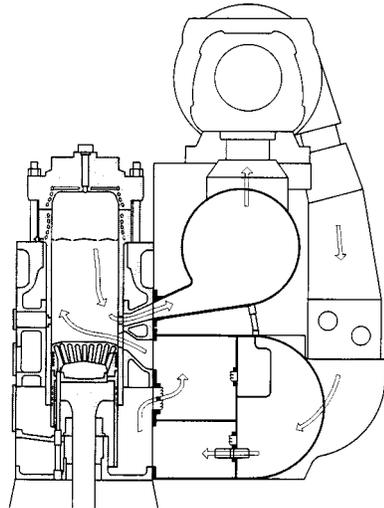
A Sulzer series RL two-stroke crosshead diesel engine.
